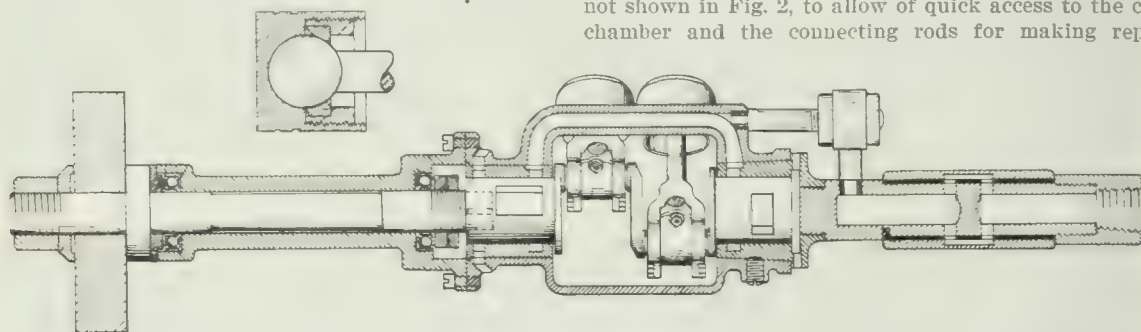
Axial Section of the Cleveland Portable Pneumatic Grinder and Detail of the Piston and Rod Connection.
